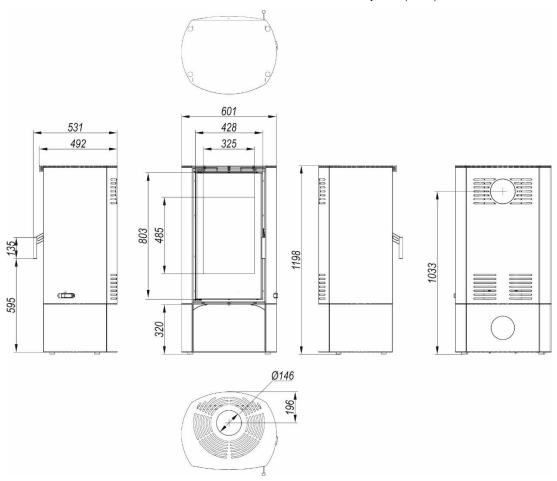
Dimensions of the DEFRO HOME OVAL dry stove (in mm)
